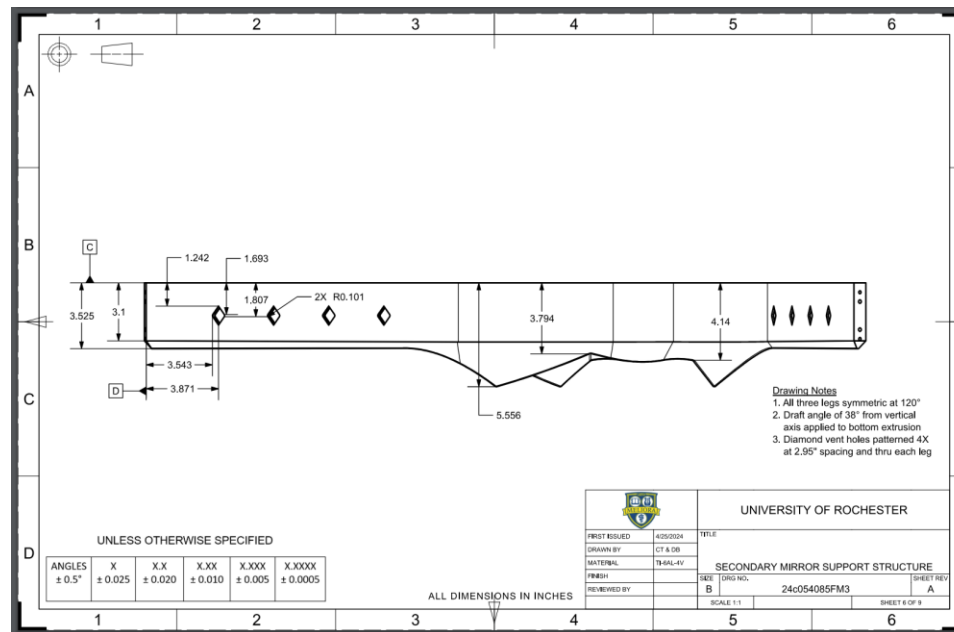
Side View Drawing with Vent Holes and Draft Angle Dimensions.
